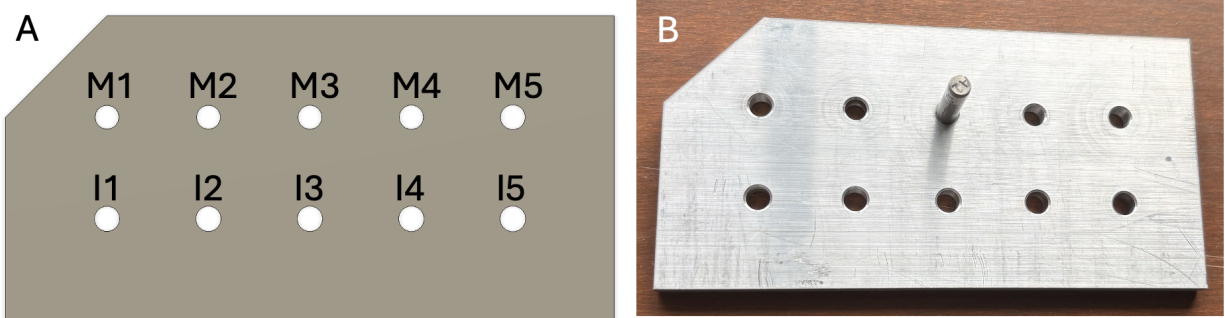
A) CAD model of tolerancing plate. Holes M1-M5 are around 6mm in diameter, and holes I1-I5 are around 0.25 in in diameter. B) Physical plate, with the dowel 2 inserted into the M3 hole.
